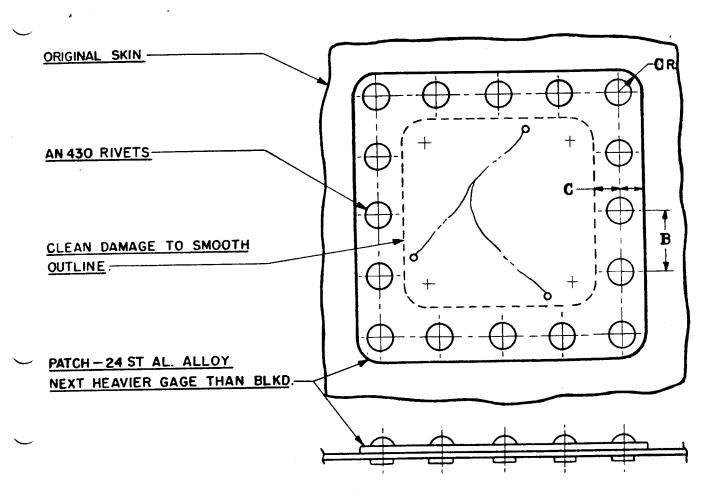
Leading Edge Skin Repair - Control Surfaces
